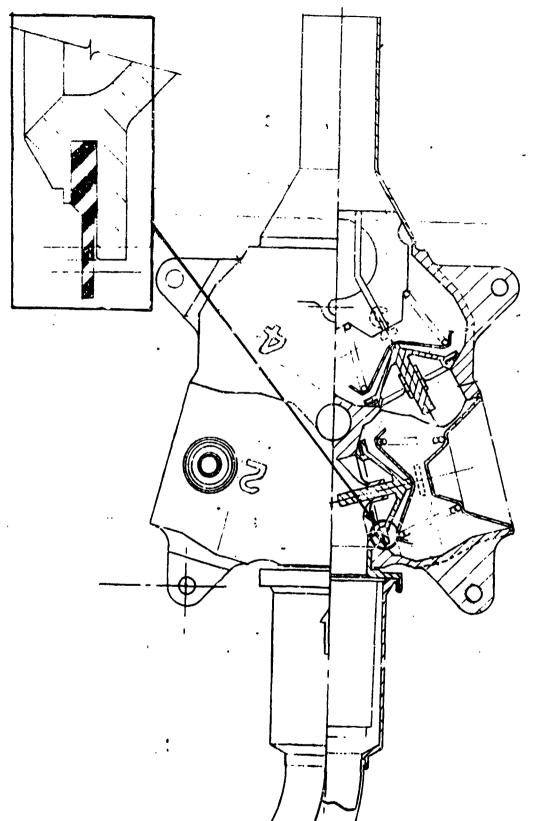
Apollo Oxidizer Check Valve Showing Seal Configuration
